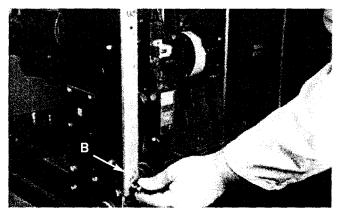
Attaching CloSure™ Test Tool at Hole "B"
